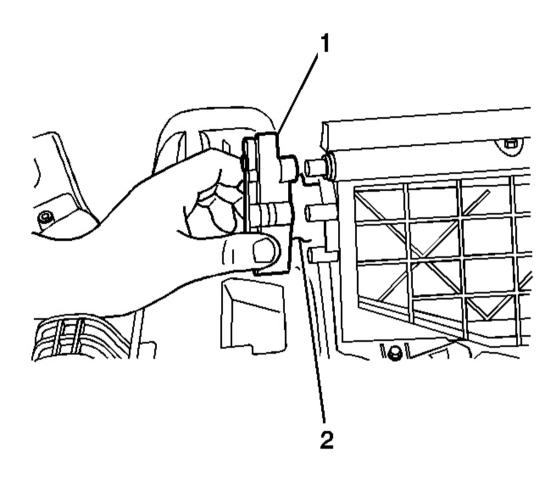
Recirculation Actuator & Recirculation Housing (Visteon) Courtesy of GENERAL MOTORS CORP.
